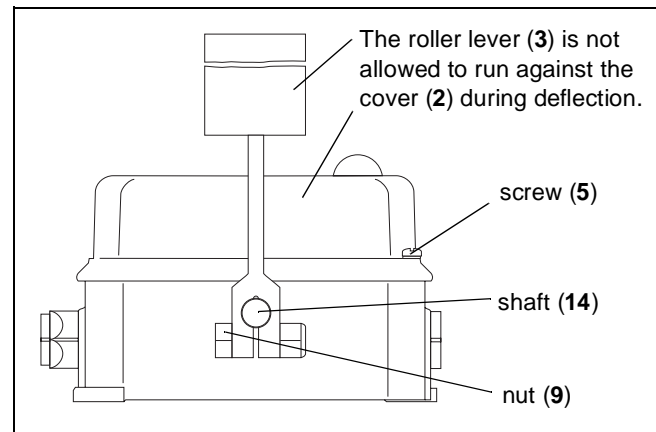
Mounting belt misalignment switches on the belt conveyor
